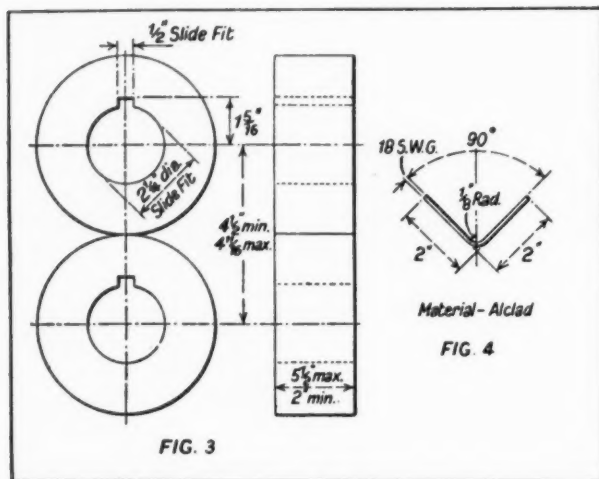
Typical Standard Sheet for Use in Designing Rolls for a Roll-forming Machine
